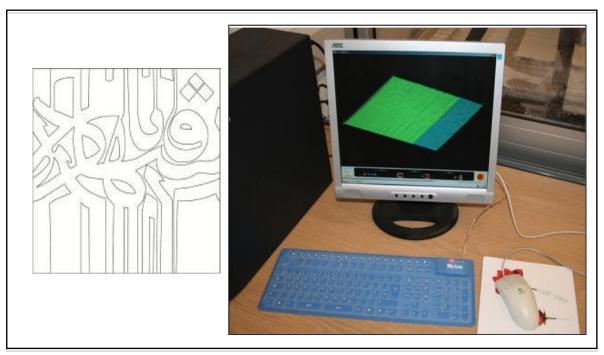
CNC Rapid Prototyping machine processing and cutting the low-relief tile design.
